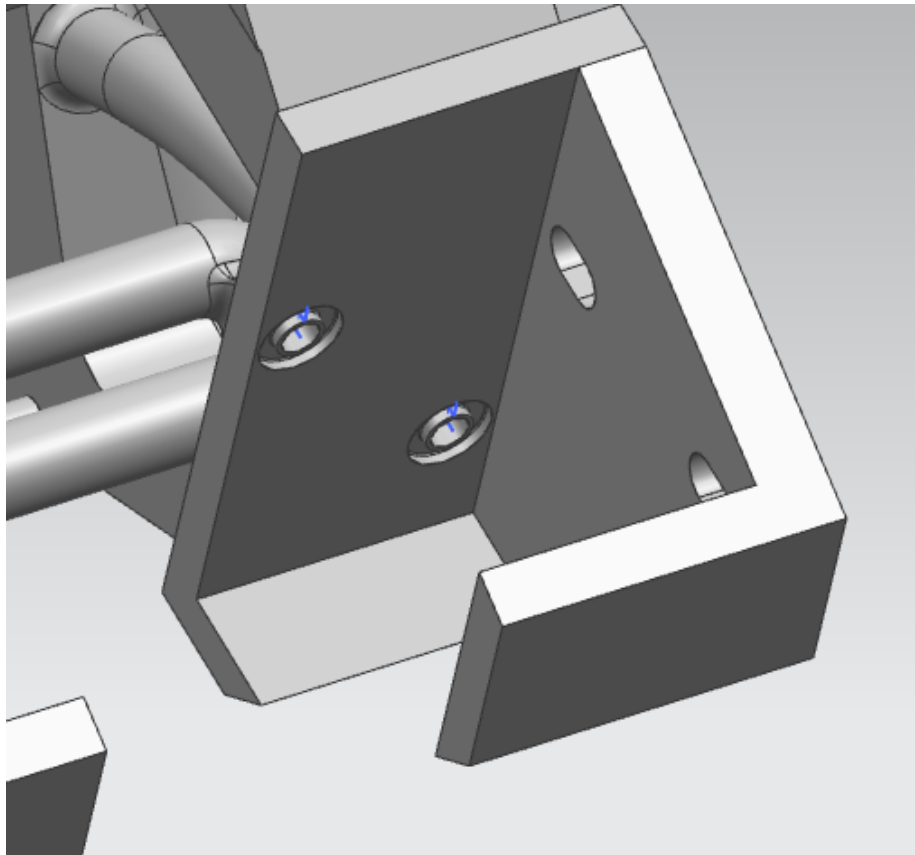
This figure shows in detail the connecting surface between the gripper and the pneumatic actuator. An o-ring is going to sit in the indentation, and seals against a flat surface on the actuator.
